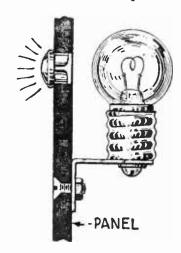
How to mount the pilot lamps. All the necessary parts may be had by breaking up a miniature base
